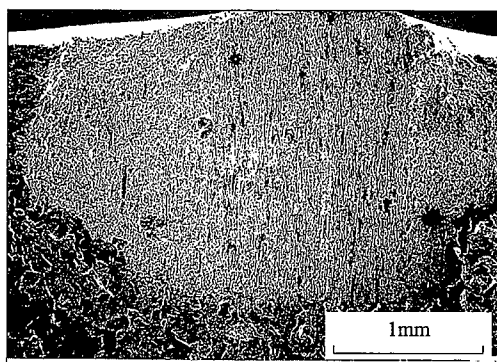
Example of fracture surface at weld interface in bend test
